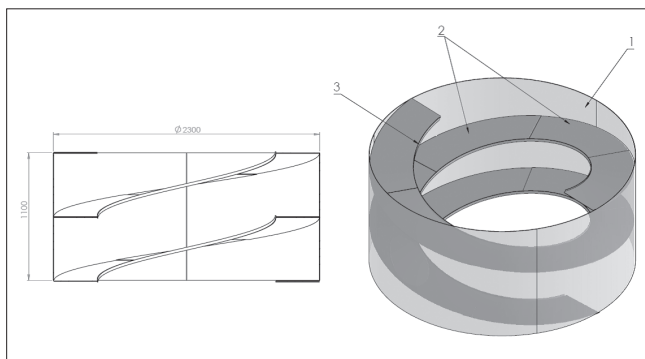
Model of the mixer drum cylinder assembly – shell and spiral segments: 1 – outer shell, 2 – spiral segments, 3 – cooper
